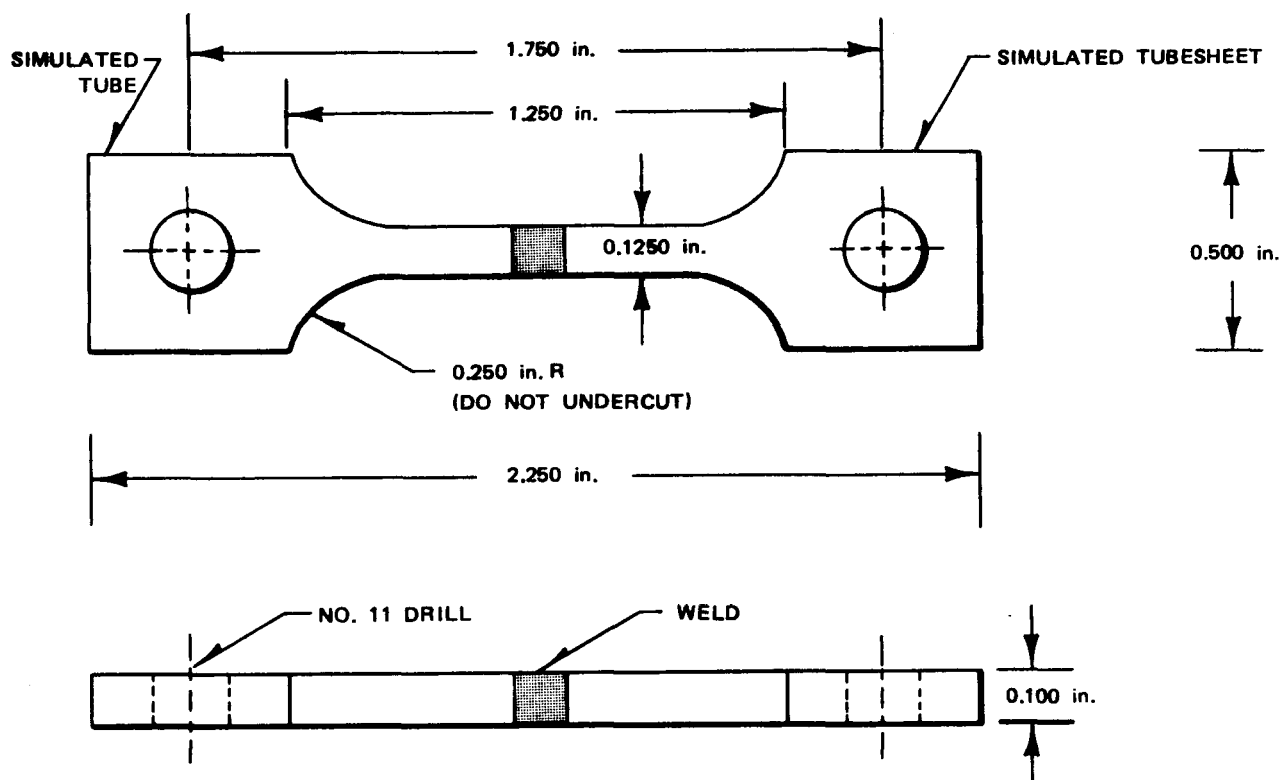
Tube-To-Tubesheet Weld Sample
